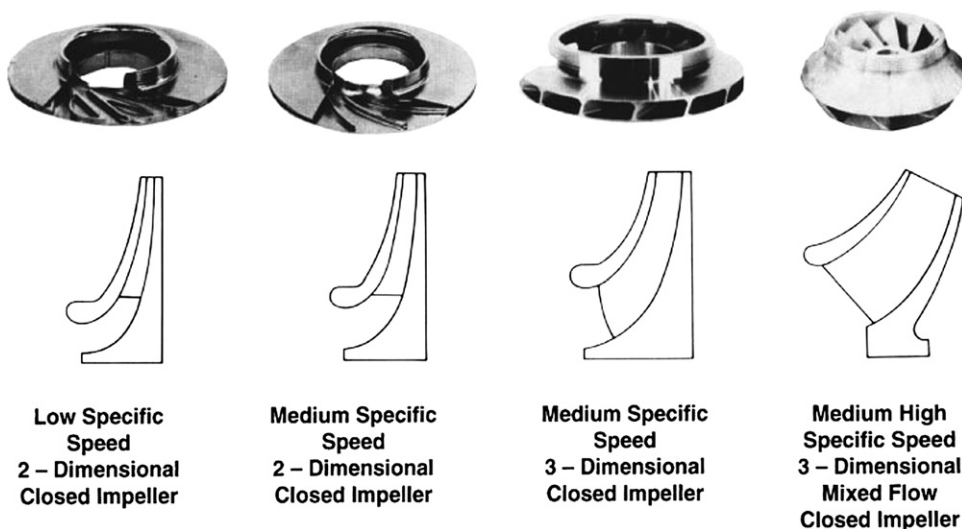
• Typical impellers (Courtesy of IMO Industries, Inc.)
